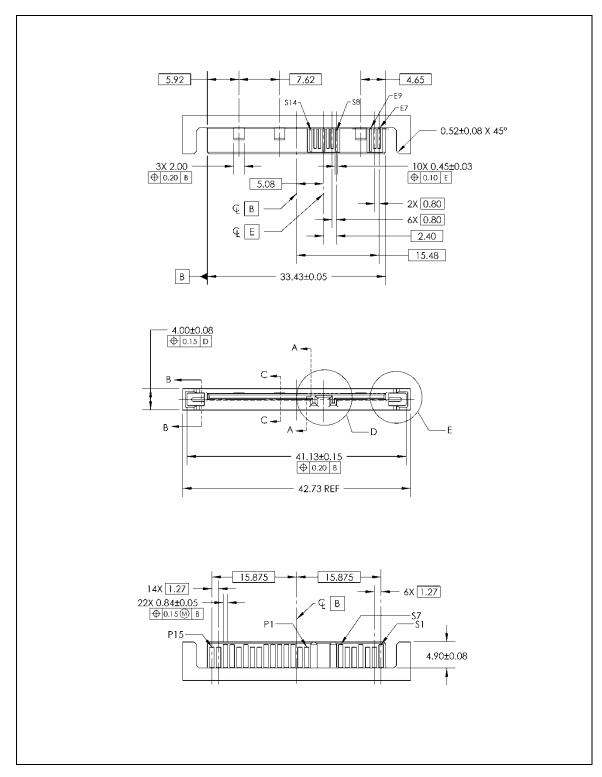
SATA Express device plug connector drawing (part 1 of 2)
